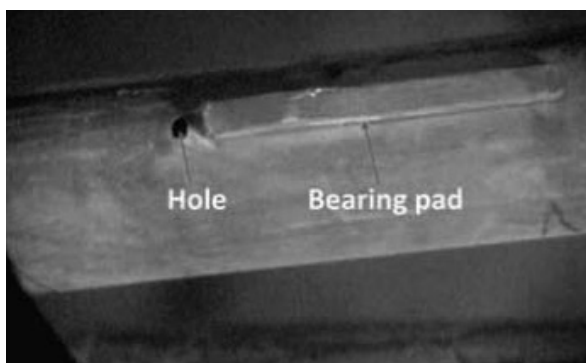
Defects due to improper resistance welding of spacer and bearing pads.
